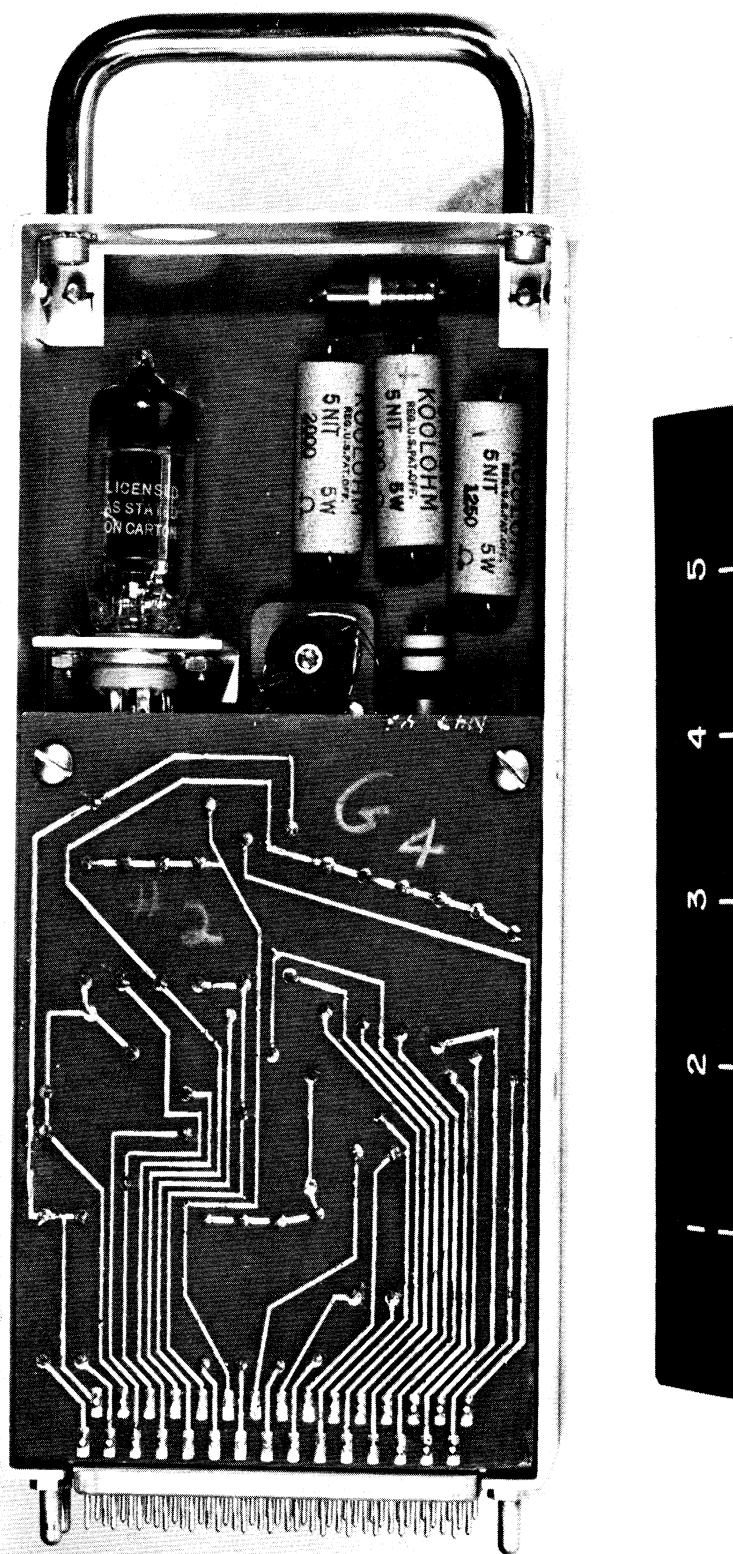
ASSEMBLED, PRINTED CIRCUIT PACKAGE
